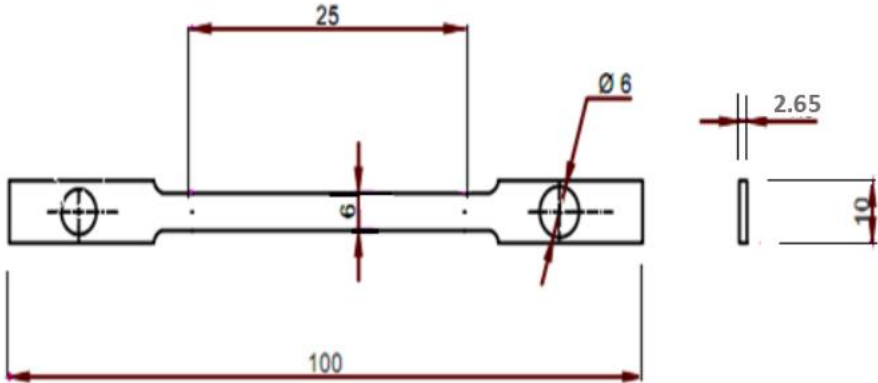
Tensile test specimen (Dimensions in mm) [130]
